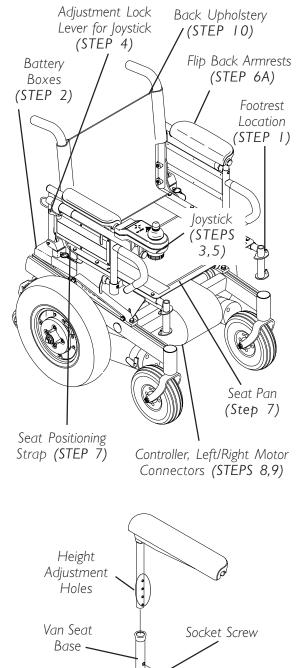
FIGURE I - PREPARATION FOR REMOVING/INSTALLING SEAT FRAME (STANDARD FRAME, ADJUSTABLE FRAME, AND VAN SEAT)
